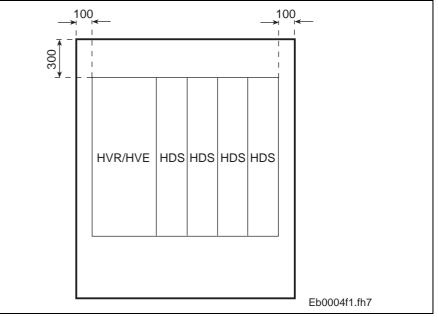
Control cabinet (uncooled, unventillated) with drive package
